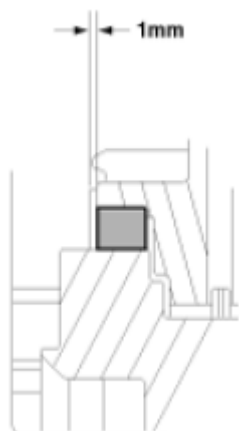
Identifying Oil Seal Depth From Cylinder Block Surface
